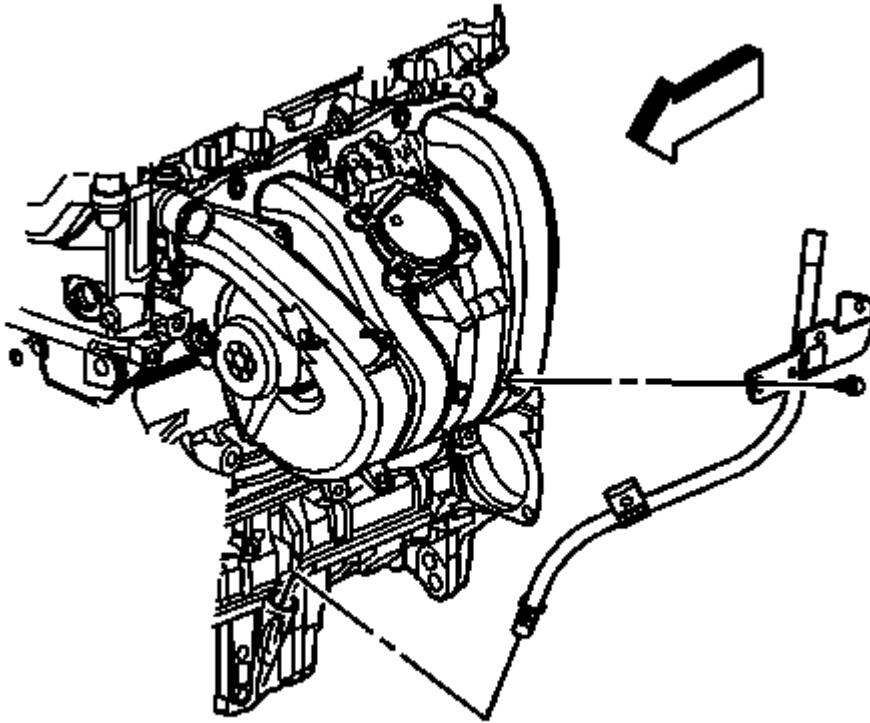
View Of Oil Level Indicator Tube & Bolt
